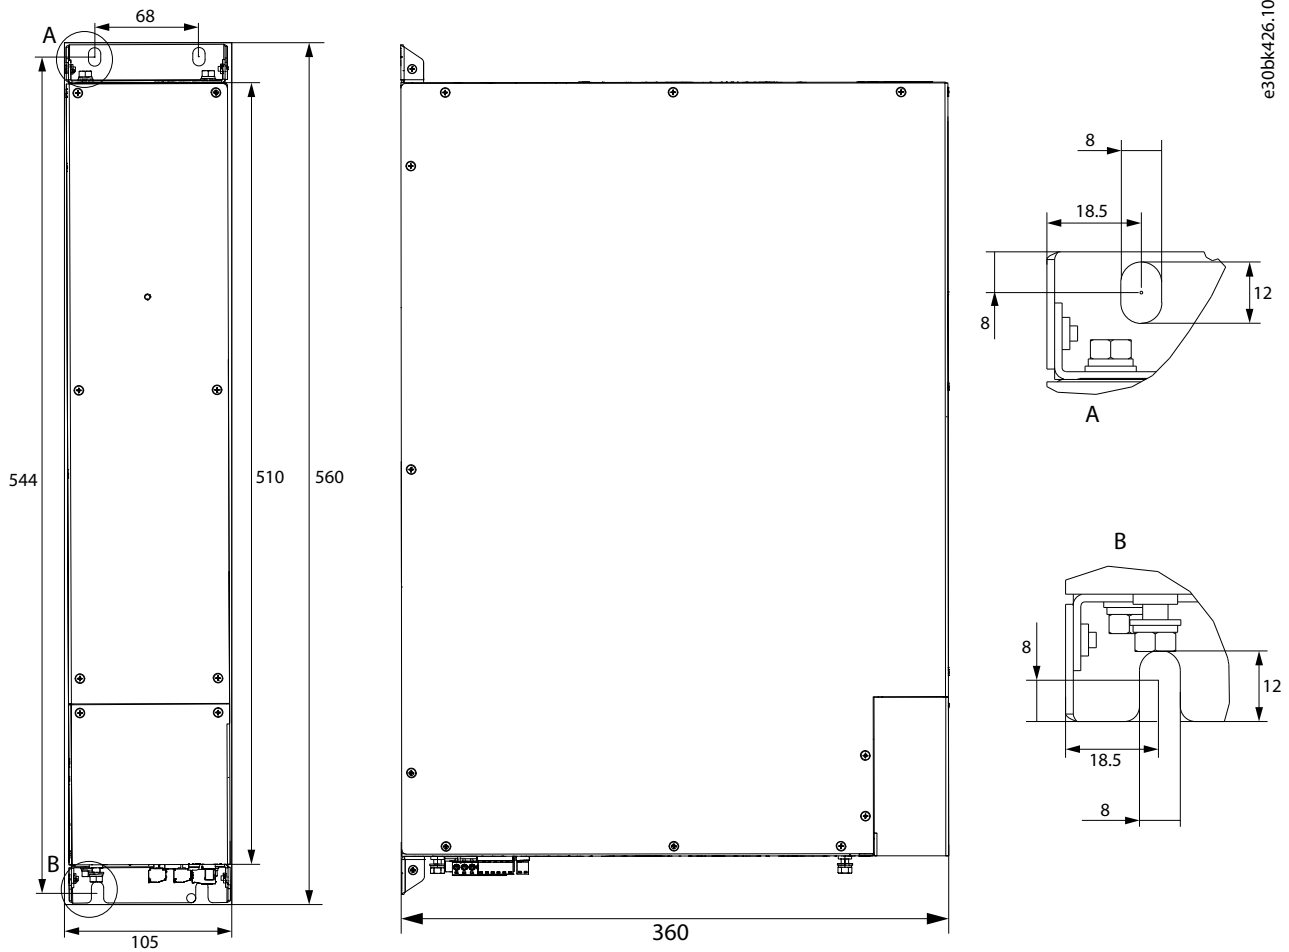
Mechanical Housing of 35 A and 55 A Modules
